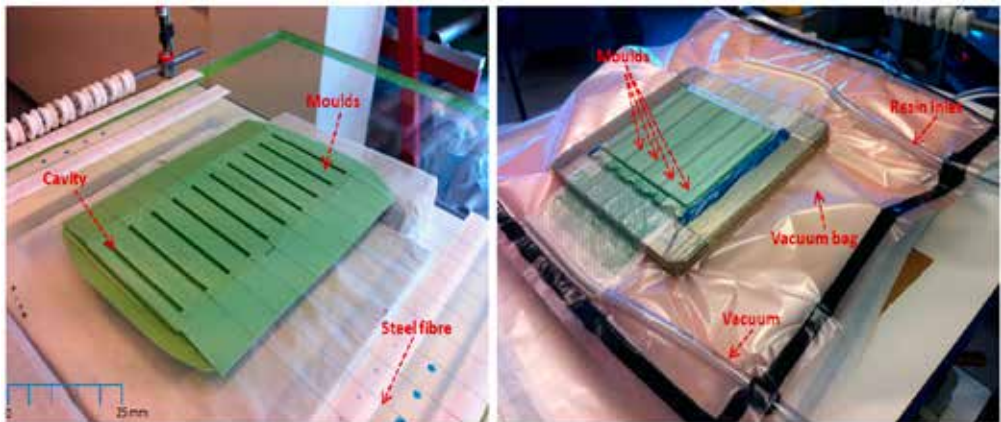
Processing setups for pull-out specimens: placement of fibre in the mould and closed silicone moulds with vacuum bagging.
